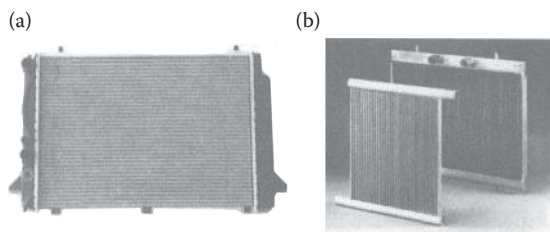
(a) A typical modern car radiator with a brazed core made of different aluminium alloys in tubes, end plates, side plates and fins, and a plastic tank on each side. (Courtesy of AKG Autokühler, Germany.) (b) Prototype of an all-aluminum car heat exchanger (Courtesy of Behr, Germany)
